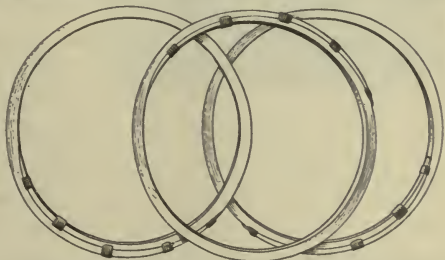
A SET OF TRUSS HOOPS USED IN SETTING UP A BARREL.
